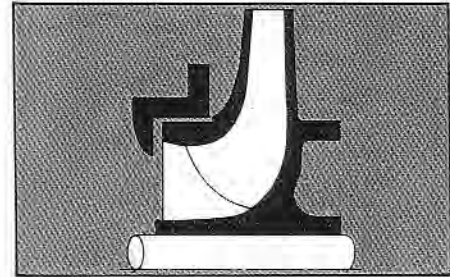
"Bulk-head ring" construction eliminates unfavorable effects of excessively large impeller eye diameter
